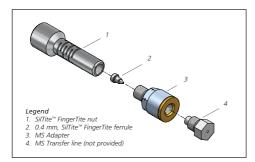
Exploded diagram of the MS SilTite™ FingerTite assembly.
